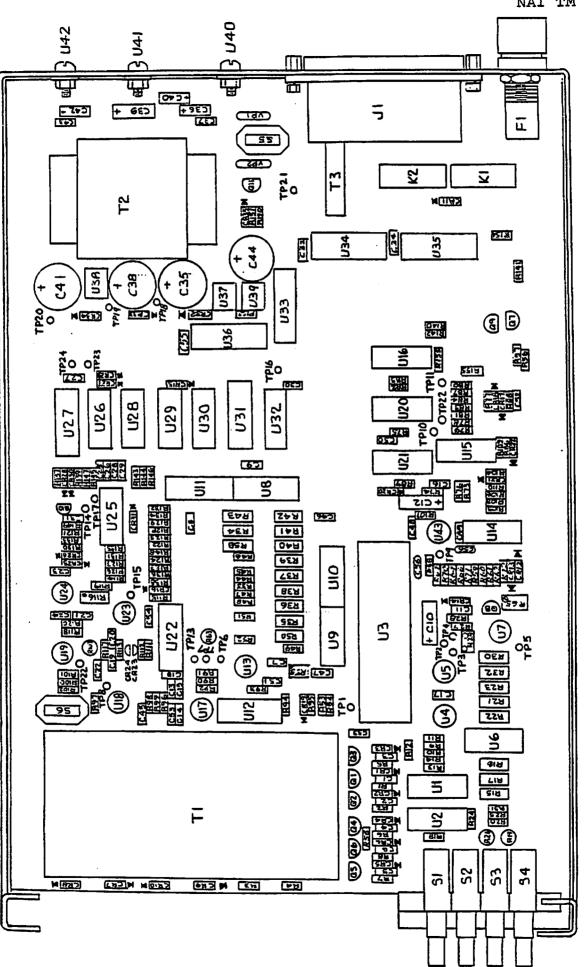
Main Chassis (±180° Option) (787205), Parts Locator
